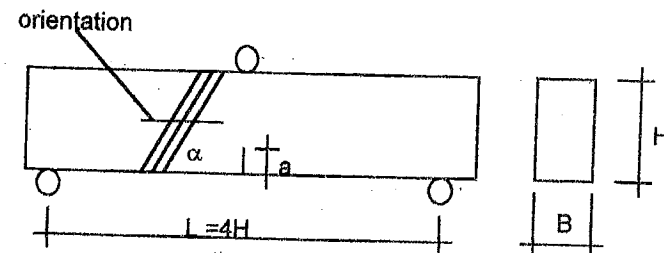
Three-point bend specimen configuration used for fatigue pre-cracking
